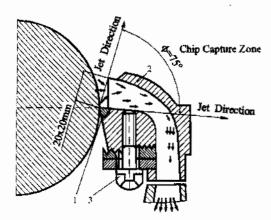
Lathe cutting tool with splinters and dust collecting system
